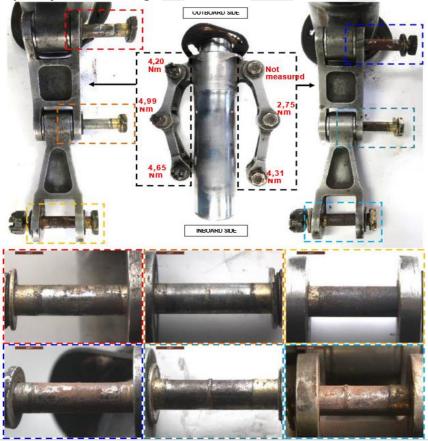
Details of the worn bolts of the half scissors connecting the slider assembly to the sleeve assembly and measured values of their tightening torque.
